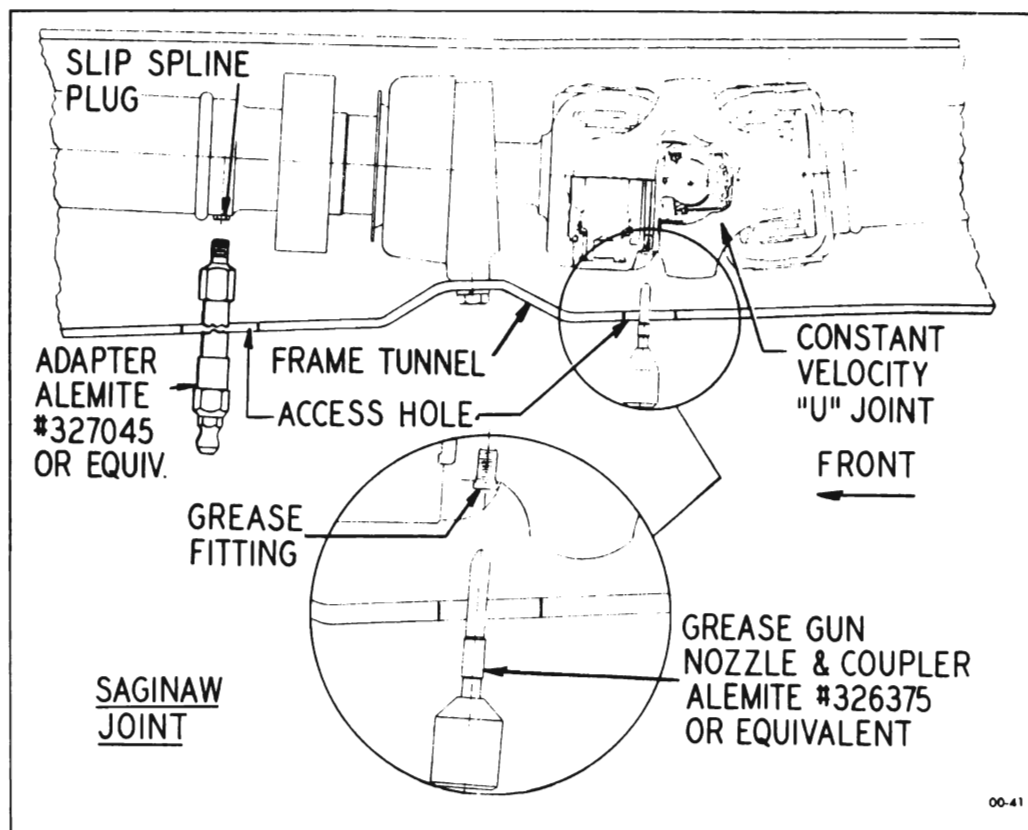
Propeller Shaft Lubrication Points (49000 Series)
